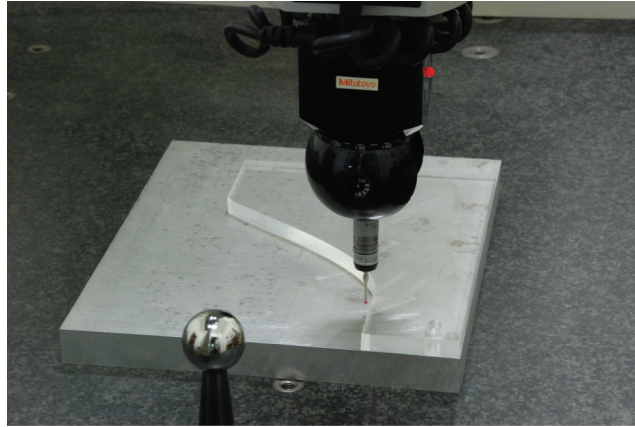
Measurement of the machined slider cam on 3-axis CMM.
